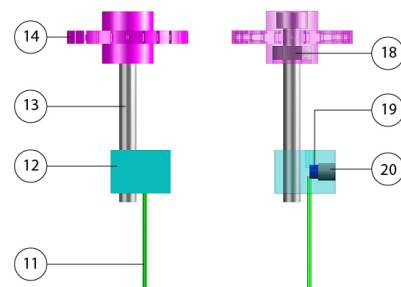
3D drawing of the actuation mechanism: (14) wheel; (13) screw M2x20; (12) rectangular block; (11) rigid tube; (18) nut M2; (19) brass part; and (20) set screw M1.6.
